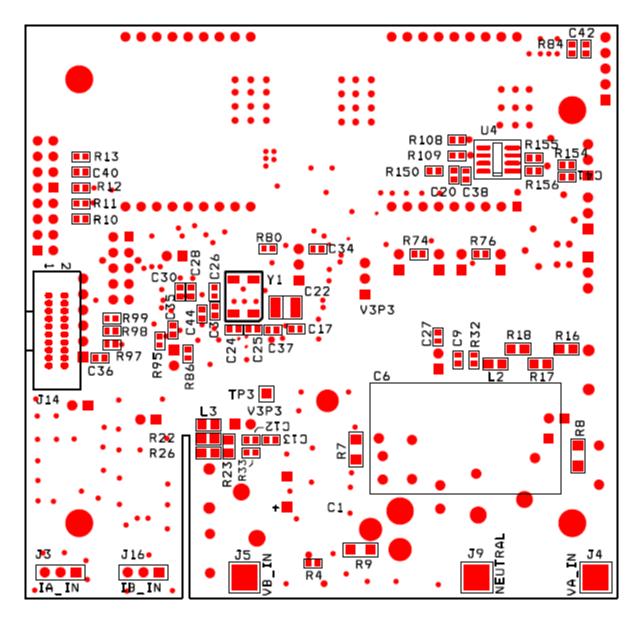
71M6531N12A2 Demo Board: Bottom View with Silk Screen
